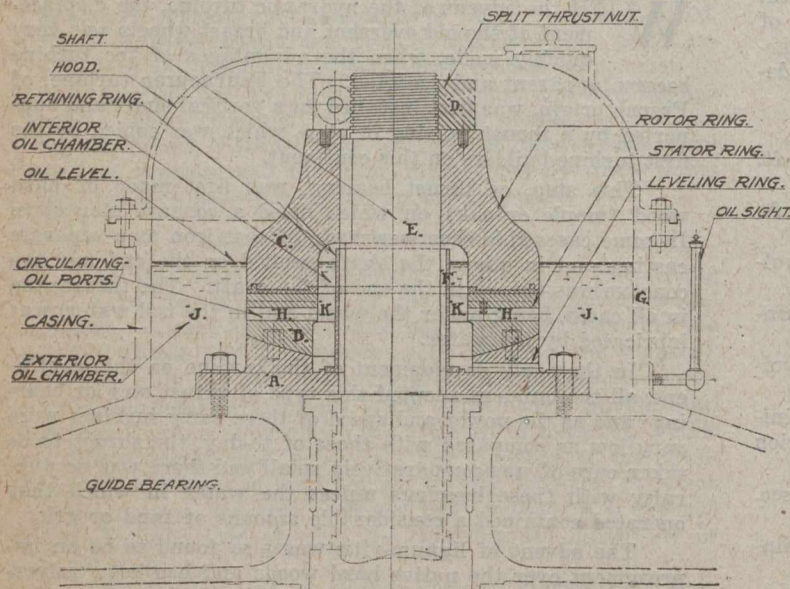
SECTION THROUGH VERTICAL THRUST BEARING
